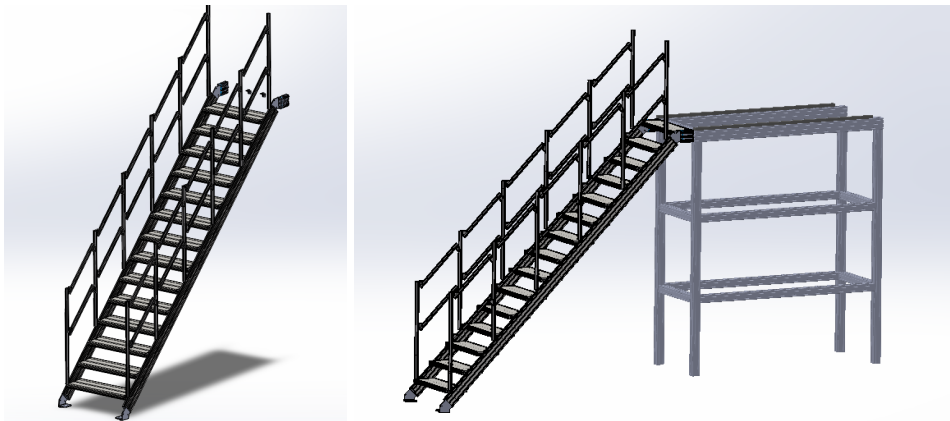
Static stair design, with railing, shown alone and connected to the stair base.
